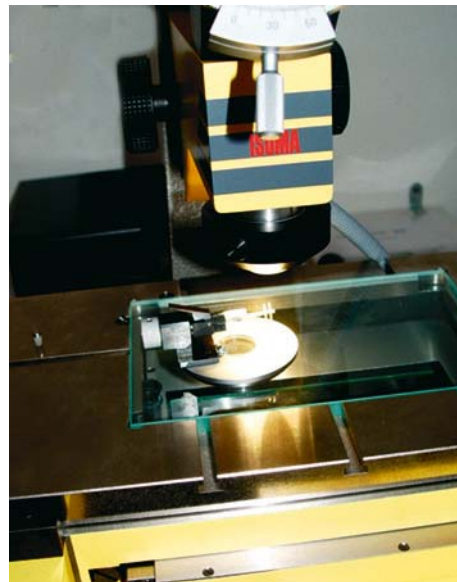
Although CNC milling machines are extremely accurate and precise, each specimen is thoroughly inspected
